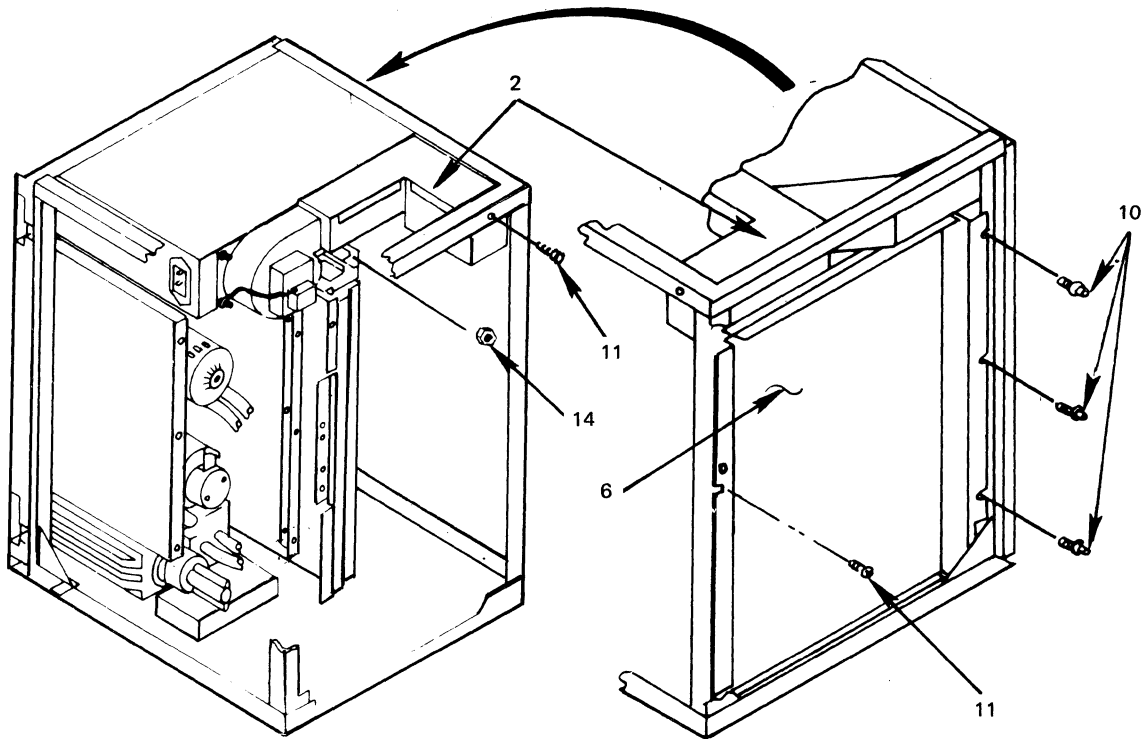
Installing the 1-Inch Foam Pad, New Motor Cover, and Lower Side Panel
